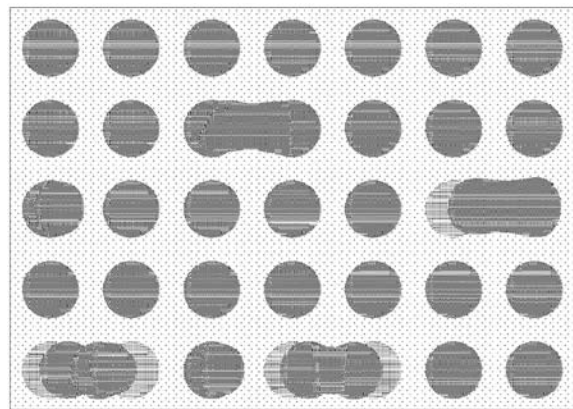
X-ray photograph of PBGA solder joints. Bridges may occur due to popcorn or delamination of PBGA. The joints flatten out and form bridges [63]
